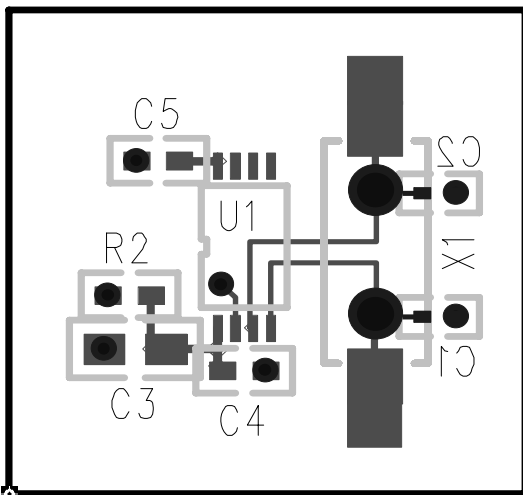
B. ICS843001BI PC BOARD LAYOUT EXAMPLE
